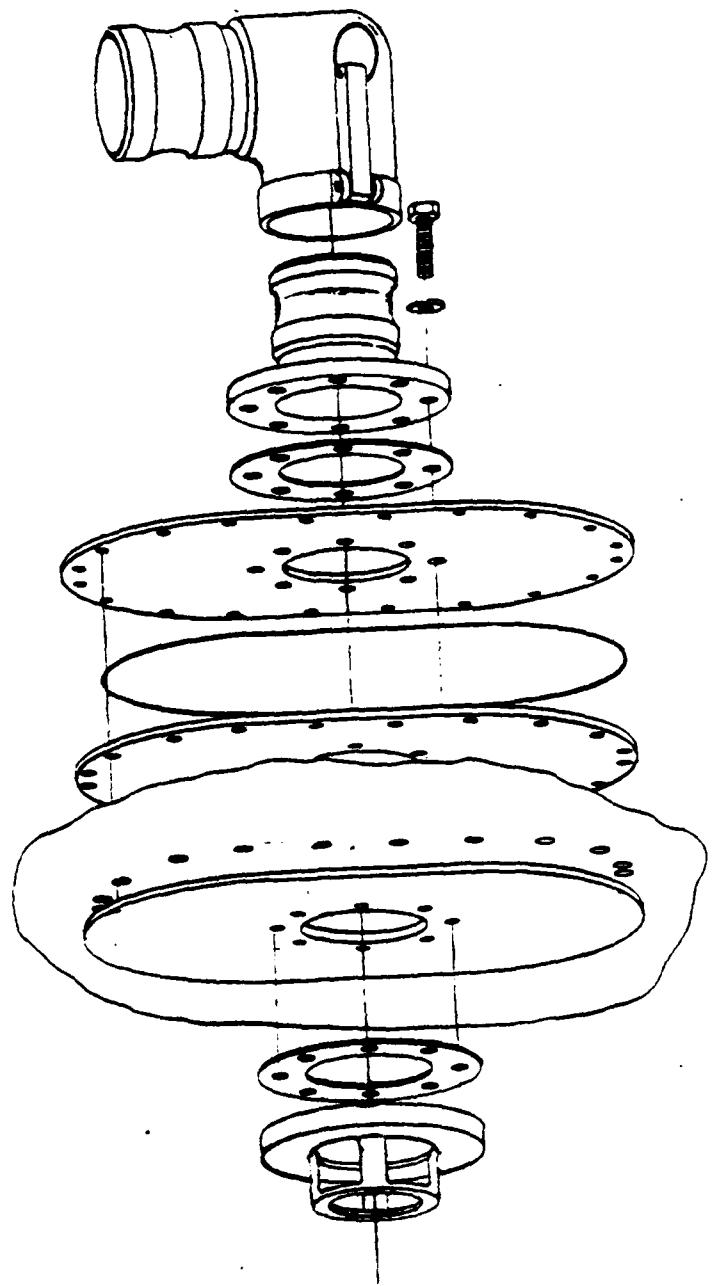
FILLER DISCHARGE ASSEMBLY
